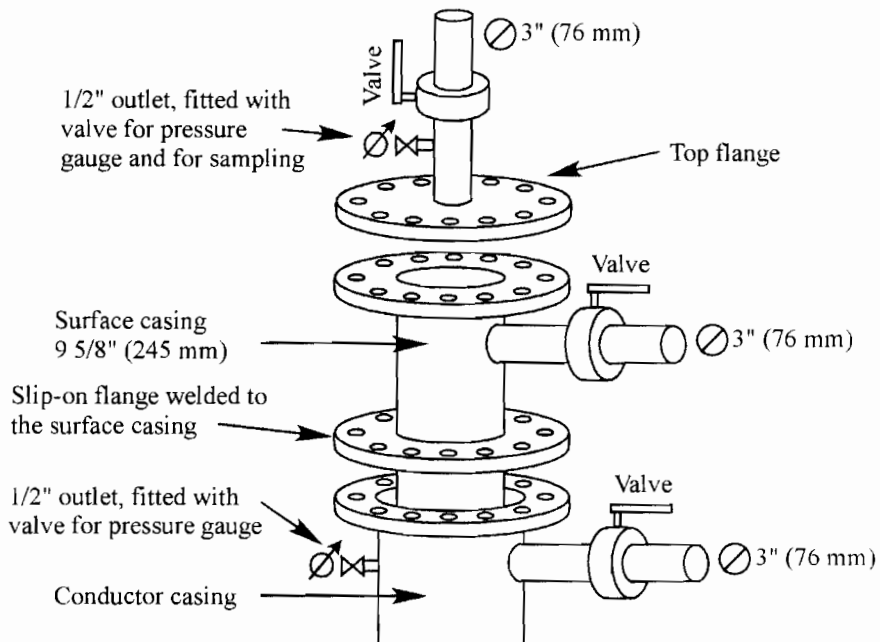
The wellhead. The production casing must have a flange to seal the annulus between it and conductor casing, both while drilling the hole, as well as cementing the production casing.
